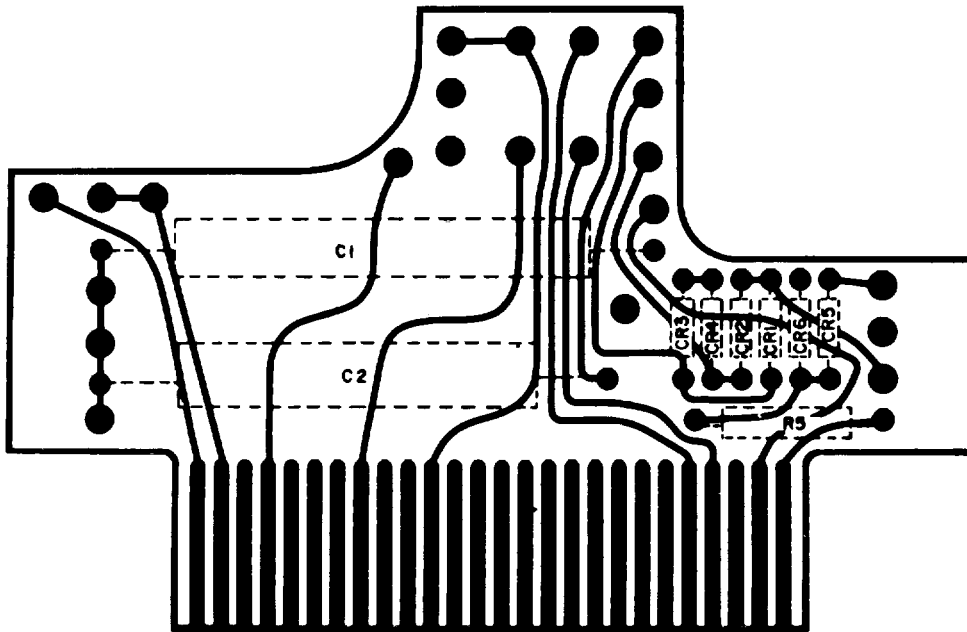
Tachometer-generator board assembly, wiring diagram, rear view.
